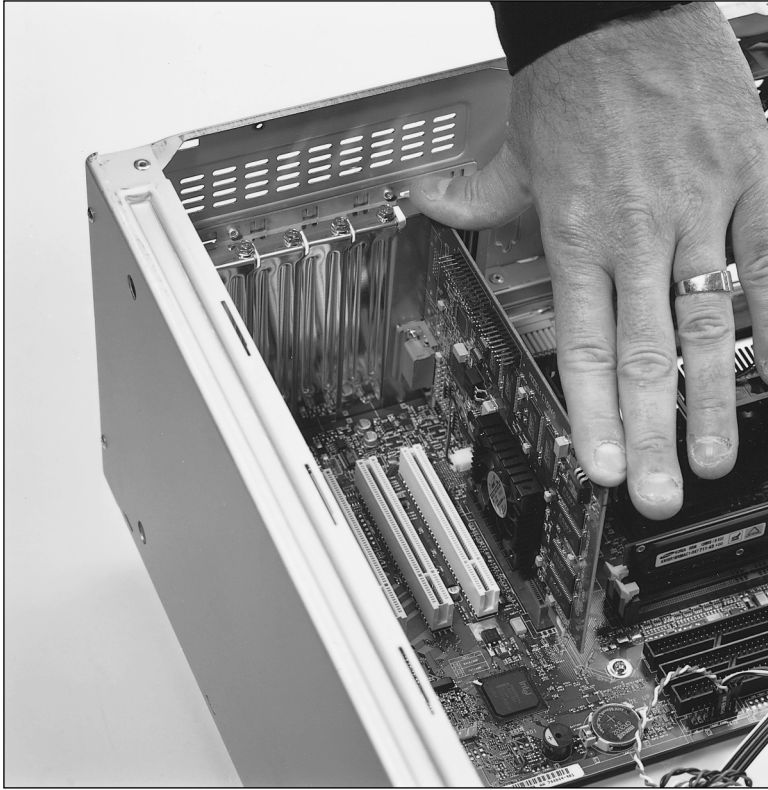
This photo shows a video adapter being inserted into the slot. *Motherboard courtesy of Intel Corporation.
